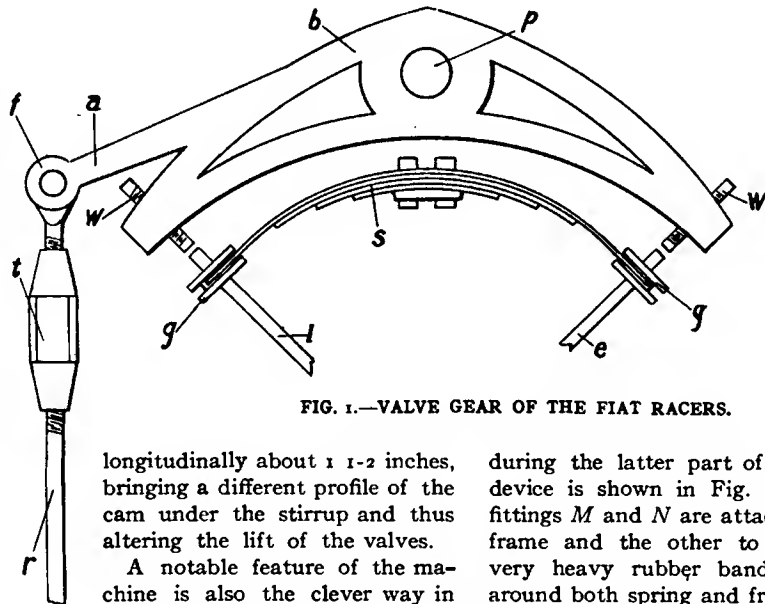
VALVE GEAR OF THE FIAT RACERS.
